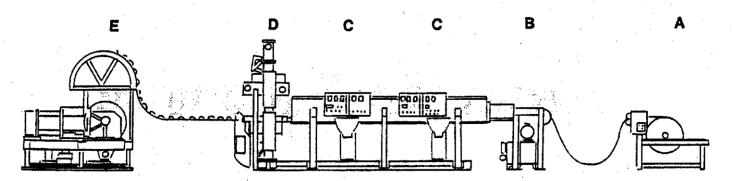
Schematic - Battenfeld Gloenco Rollfed Sheet + Thermoforming Line (13). A: Rollfed Sheet Take-off Station. B: Pin Chain Engagement. C: Heater Zone. D: Forming Station. E: In-Line Separate Mechanical Toggle-Clamp Trim Station.
